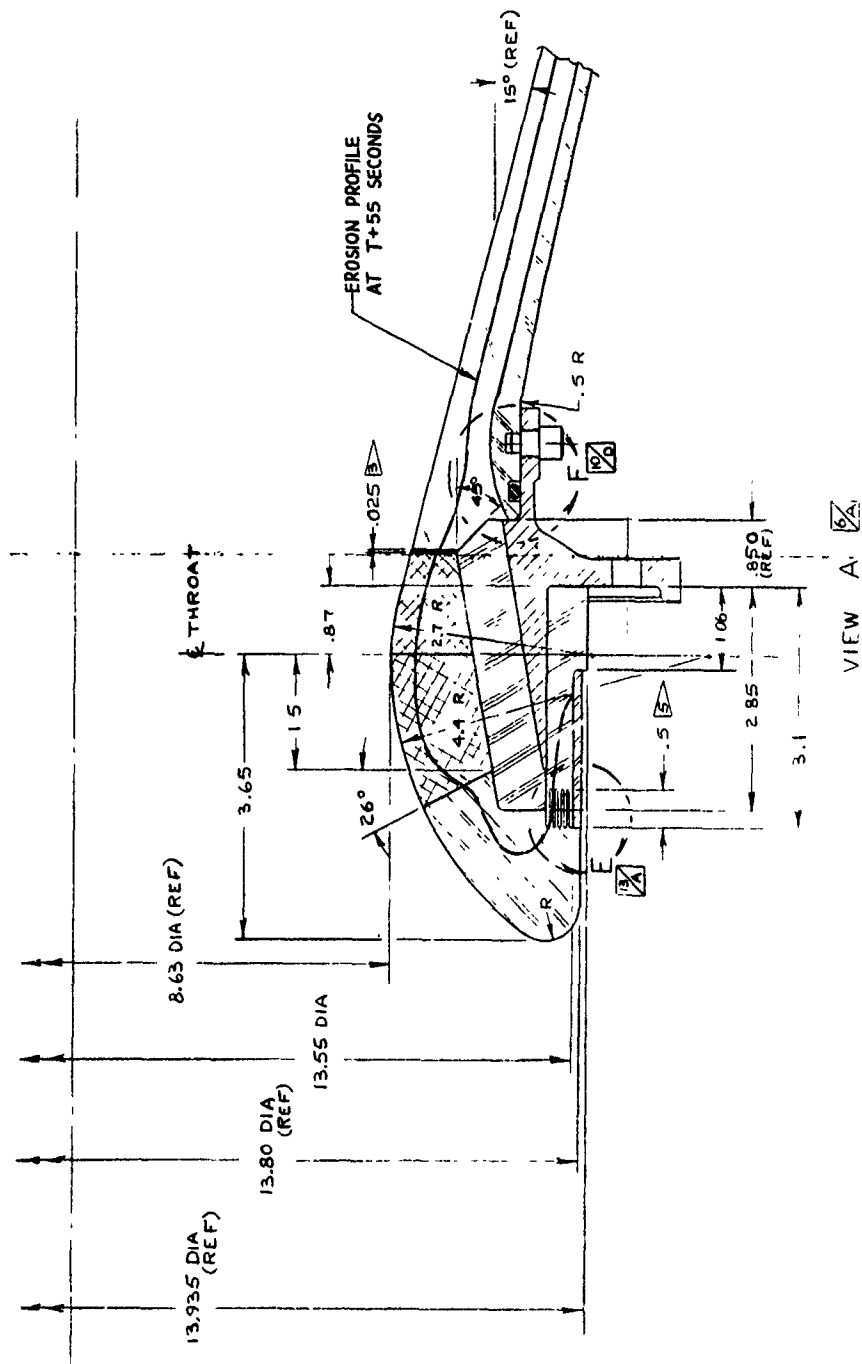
Nozzle Erosion Profile - Drawing 9U34907
